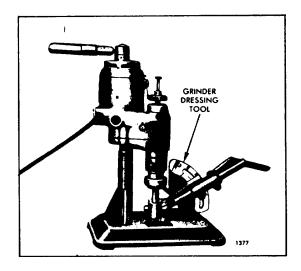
Grinding Wheel Dressing Tool of Set J 8165
